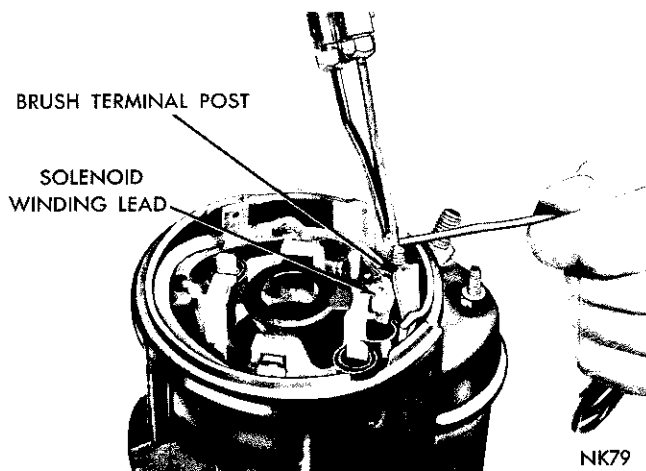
Soldering the Solenoid Winding Lead to the Brush Terminal
